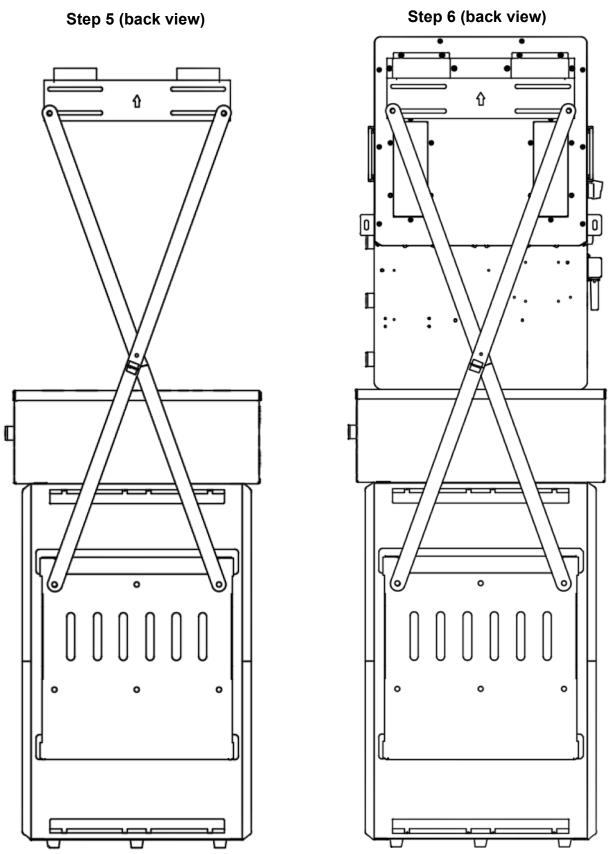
WallMount Installation with Conduit Box & 12/18kPV Steps 5 & 6
